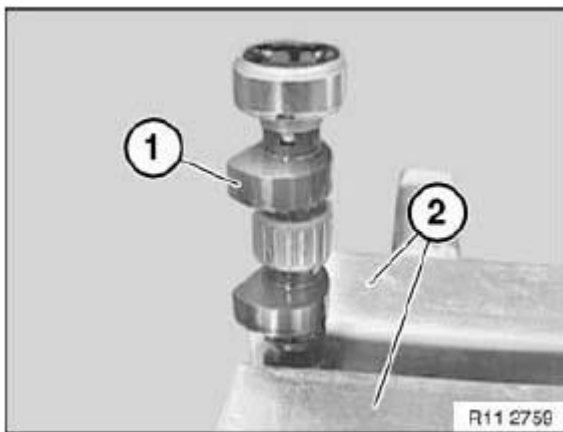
Clamping Eccentric Shaft Illustrated With Protective Jaws In Vice
